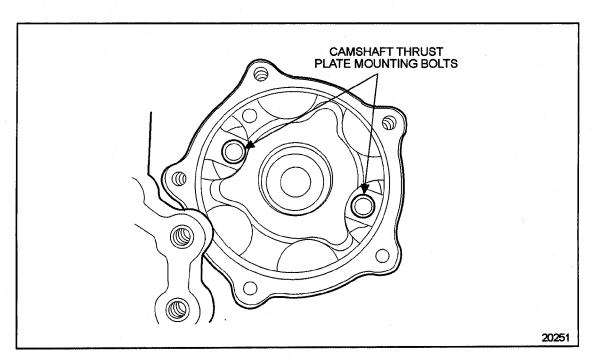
Camshaft Thrust Plate Mounting Bolts
